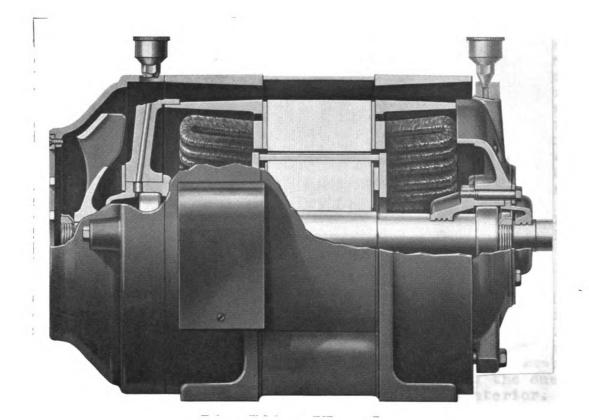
Cut-Away View Showing Interior Construction of Totally-Enclosed-Fan-Ventilated Motor.
